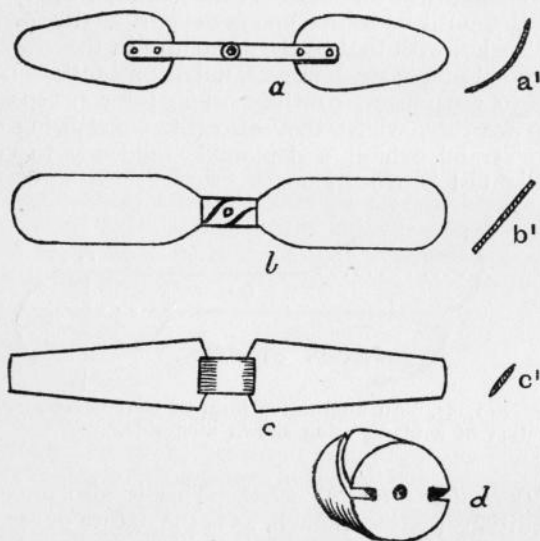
A. A built-up screw consisting of aluminium blades riveted to a central arm. FIG. 58B. A vulcanite or celluloid screw in which the blades are held in a piece of thin brass tube pinched at each end to the required angle. FIG. 58C. A wood screw, consisting of plain flat blades, glued into "saw-cuts" in a wooden boss.
